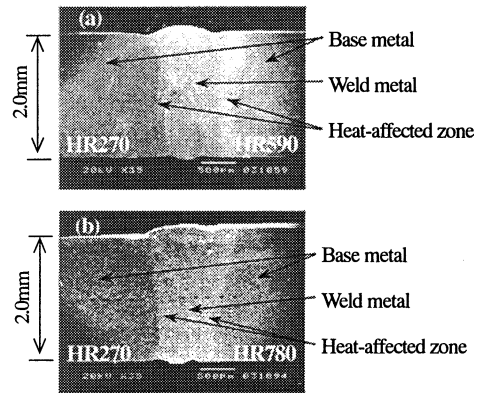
Transverse cross section of CO<sub>2</sub> laser welded butt joints, (a)HR270&HR590 and (b)HR270&HR780.
